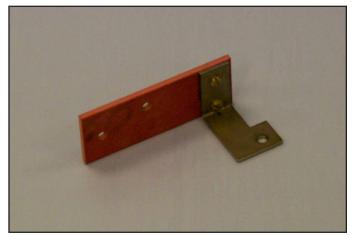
Trip Finger Mounted to the Trip Finger Insulating Plate.
